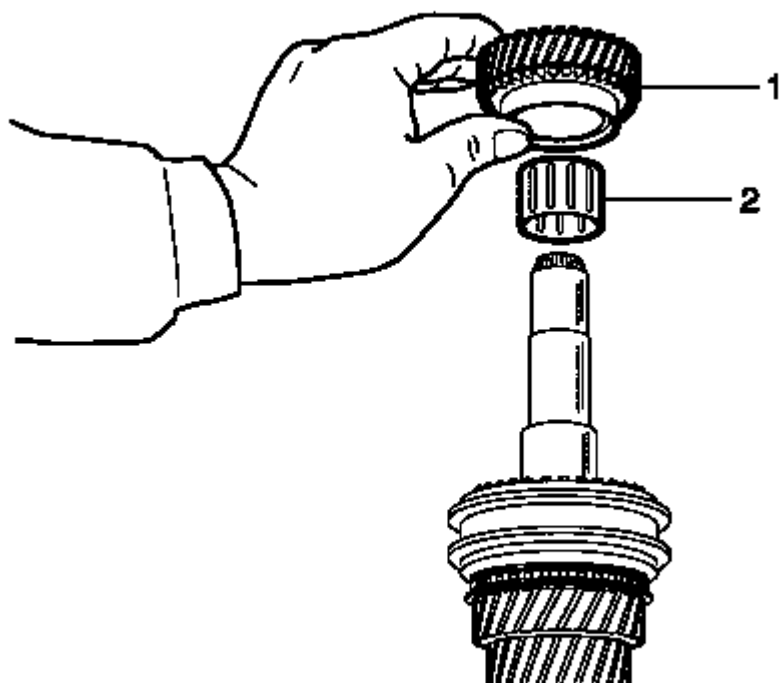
Input Shaft 4th Gear Bearing And 4th Gear
